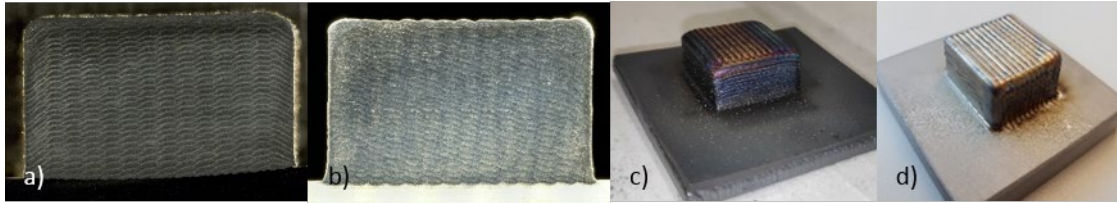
Generation of 3-d structures (a) & (c) powder; (b) & (d) wire
